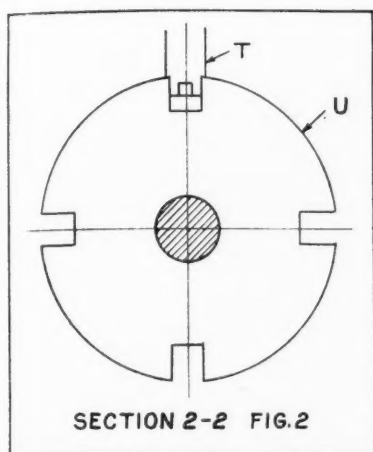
Disk U Which is Employed to Lock Crankshaft P Stationary
